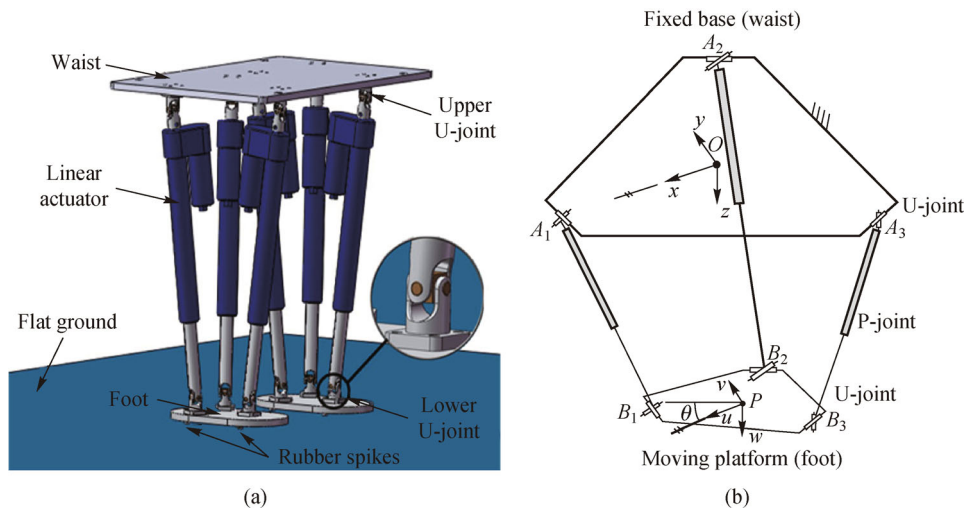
Design of the Cassino biped locomotor: (a) 3D model; (b) kinematic scheme
